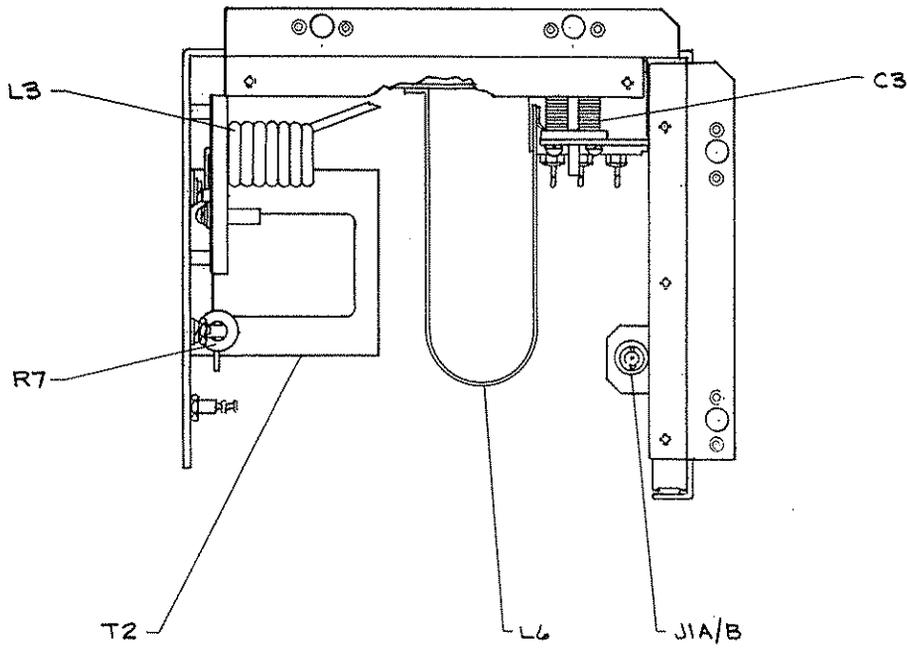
FM-1.5A CABINET COMPONENT LOCATOR, POWER RIGHT SIDE
